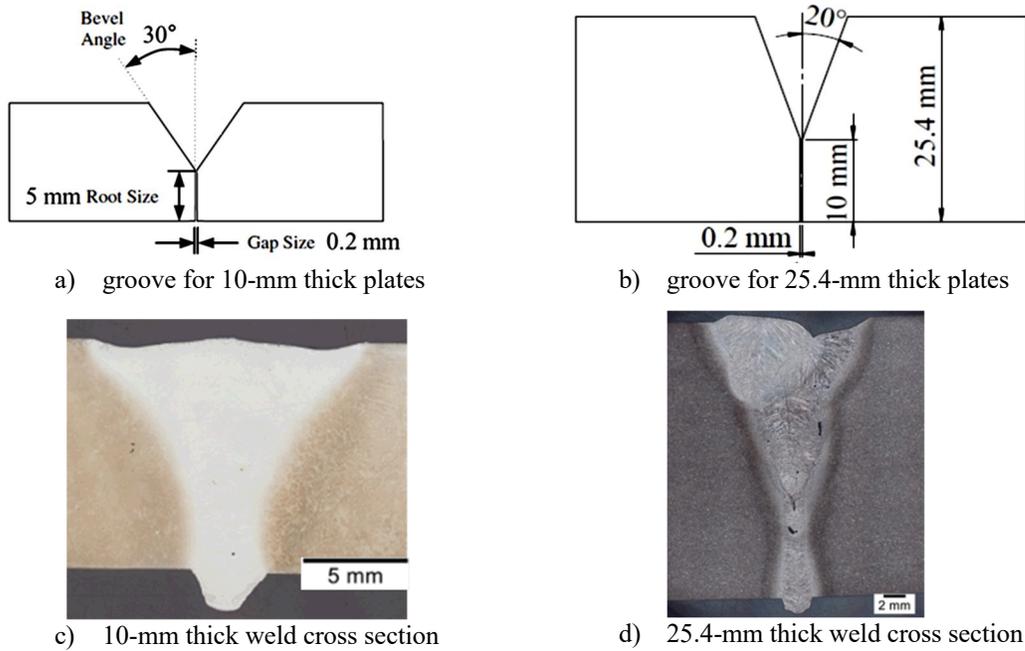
Groove design and weld cross sections for the two plate thicknesses
